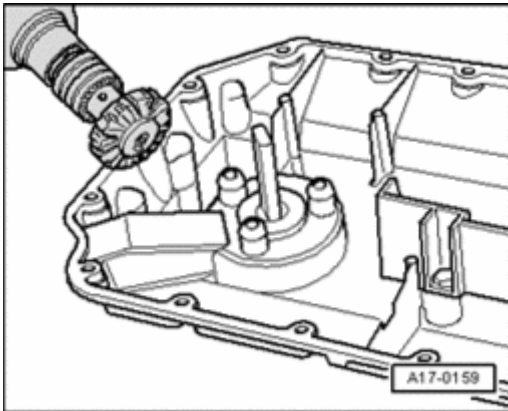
Using Rotating Plastic Brush To Remove Any Remaining Sealant From Oil Pan (Lower Part) And At Upper Part
